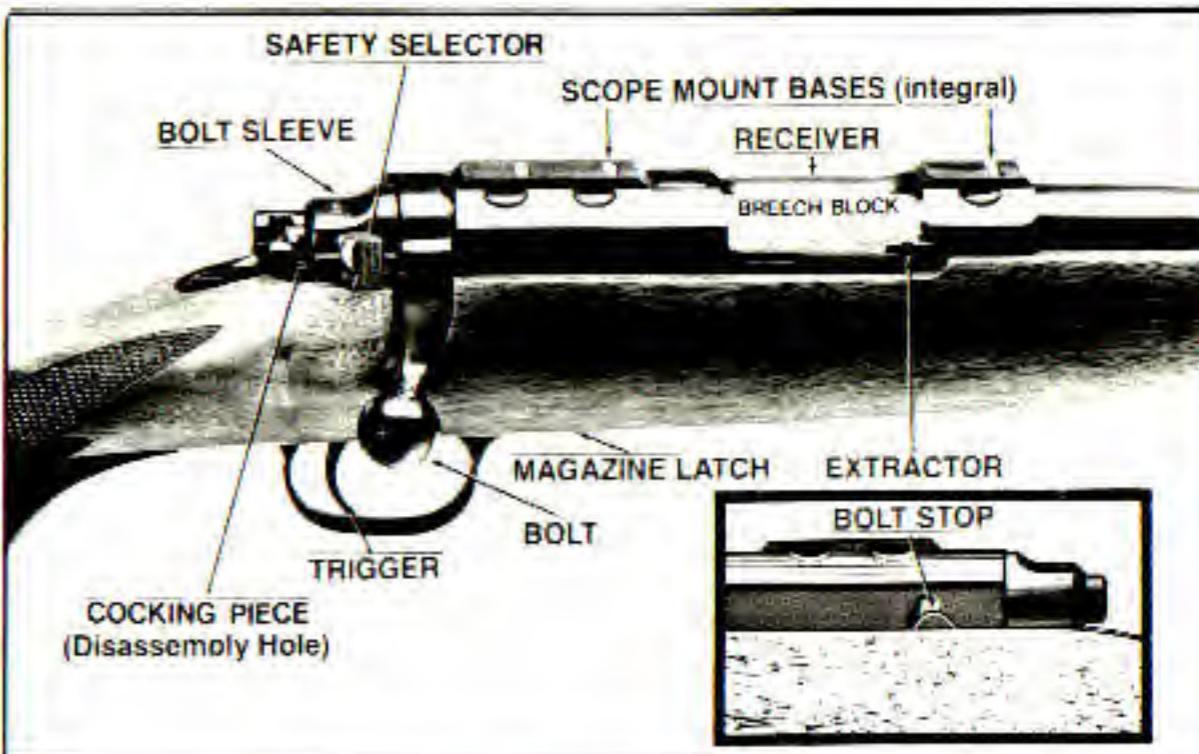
Components frequently referred to are identified. In this illustration the cocking piece is shown cocked (protruding from the rear of the bolt sleeve) revealing the disassembly hole in the lower portion of the cocking piece. The bolt stop (on the left side of the receiver) permits the bolt to be withdrawn simply by pressing down lightly with the thumbnail. The safety selector (shown in the "Fire" position) should be in the "Load-Unload" position when the bolt is being removed or being installed.
